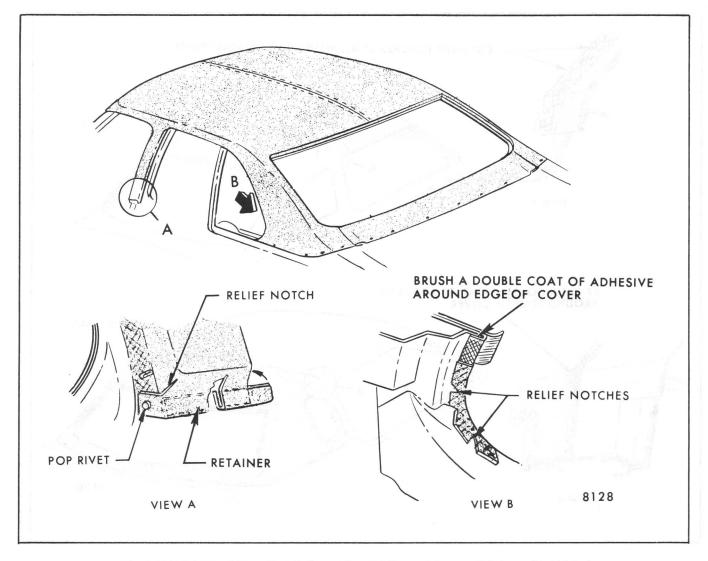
Fabric Roof Cover Installation at Center Pillar and Quarter Window - "A-29" Styles
